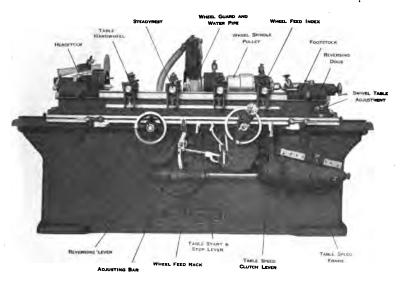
Plain grinding machine. (Courtesy Norton Co.)
